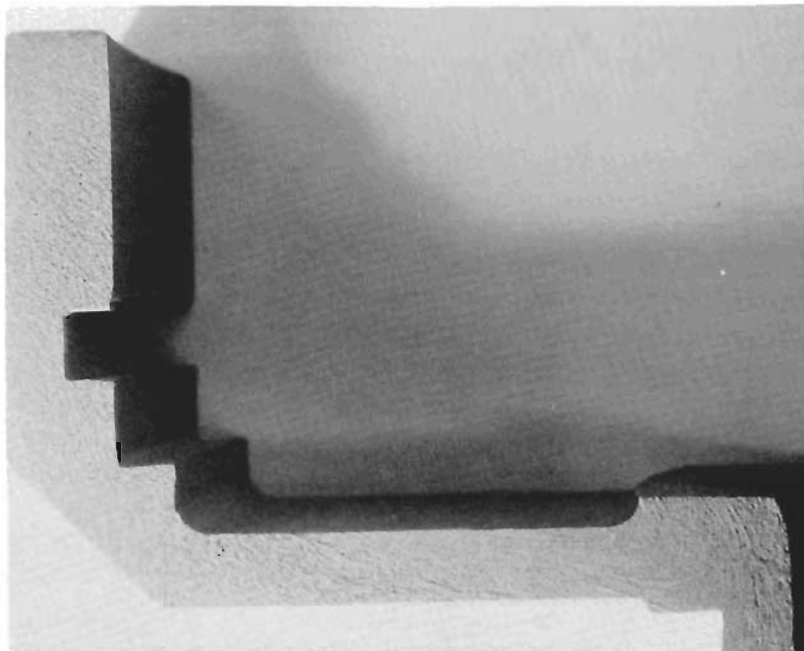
Internal gear blank, 1/4×. Macroetched to show material flow lines after forging and machining.
